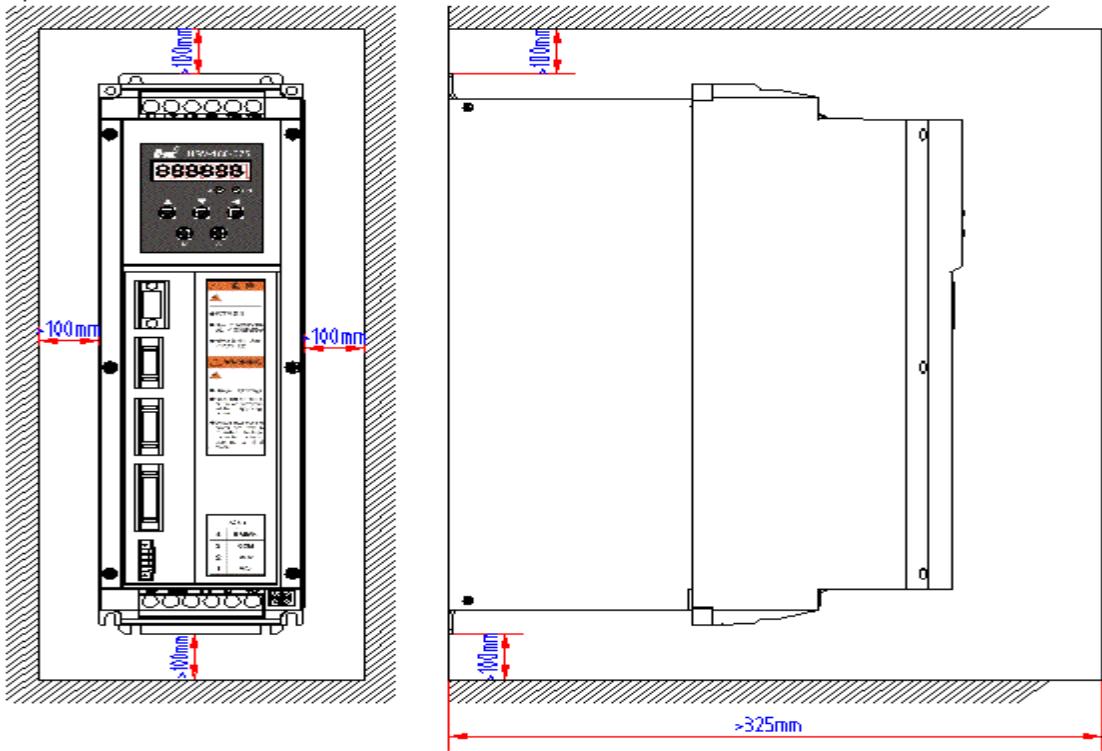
Installation interval of HSV-180AS- 035, 050, 075 single spindle drive
